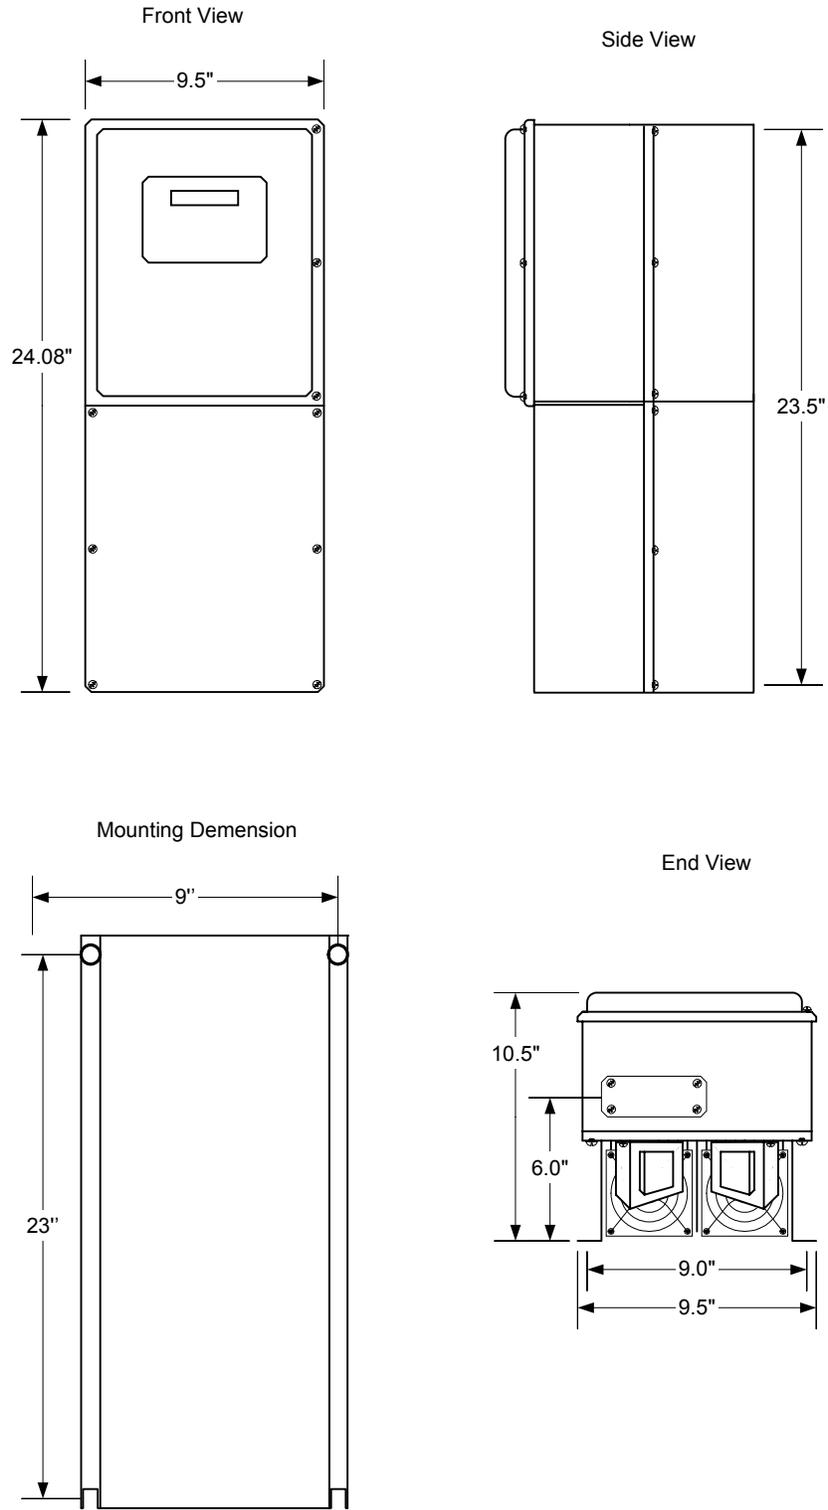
A - SV3000 DIMENSIONS FOR 25-40HP/460VAC & 15-20HP/230VAC- REFER TO PAGE 6
